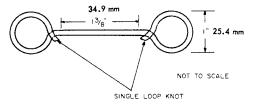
Tension Specimen for Tubing Less Than 2.29 mm (0.090 in.)
